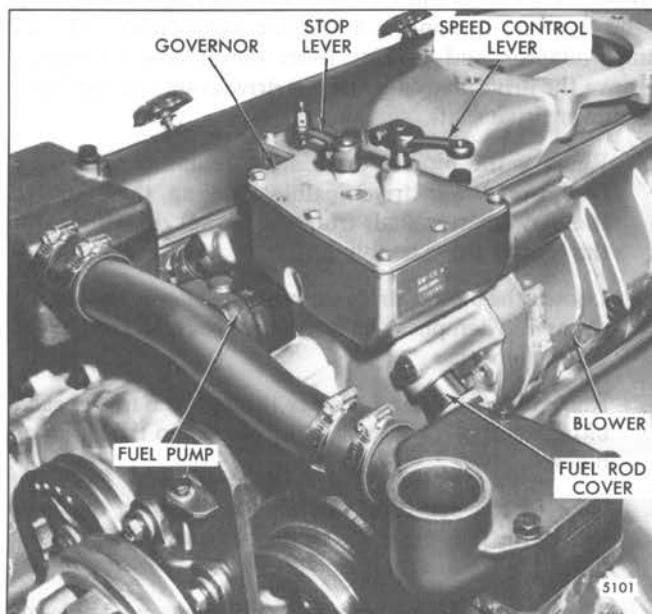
Limiting Speed Mechanical Governor Mounting
